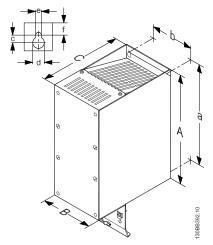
IP20 Wall Mounted Foot Print Filters
